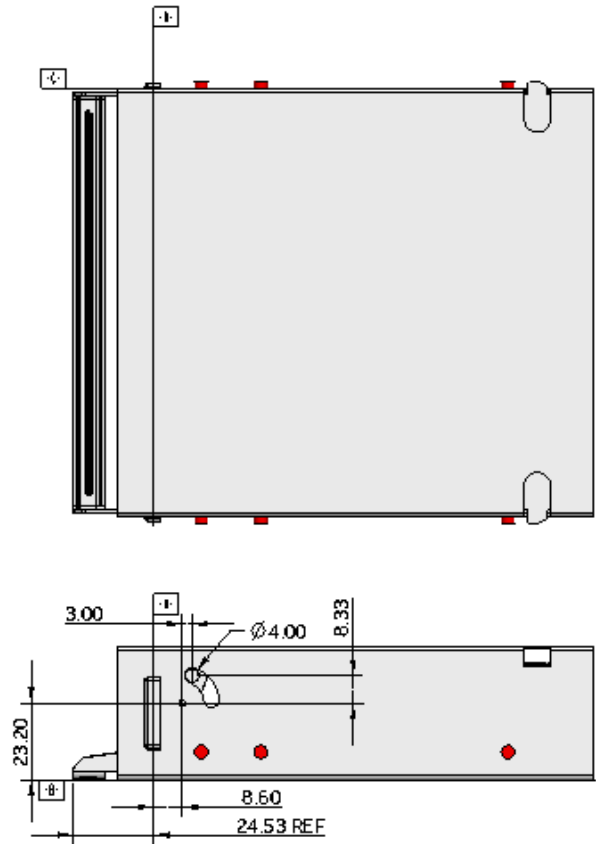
Cantilever Latch Location from Bay Datum
